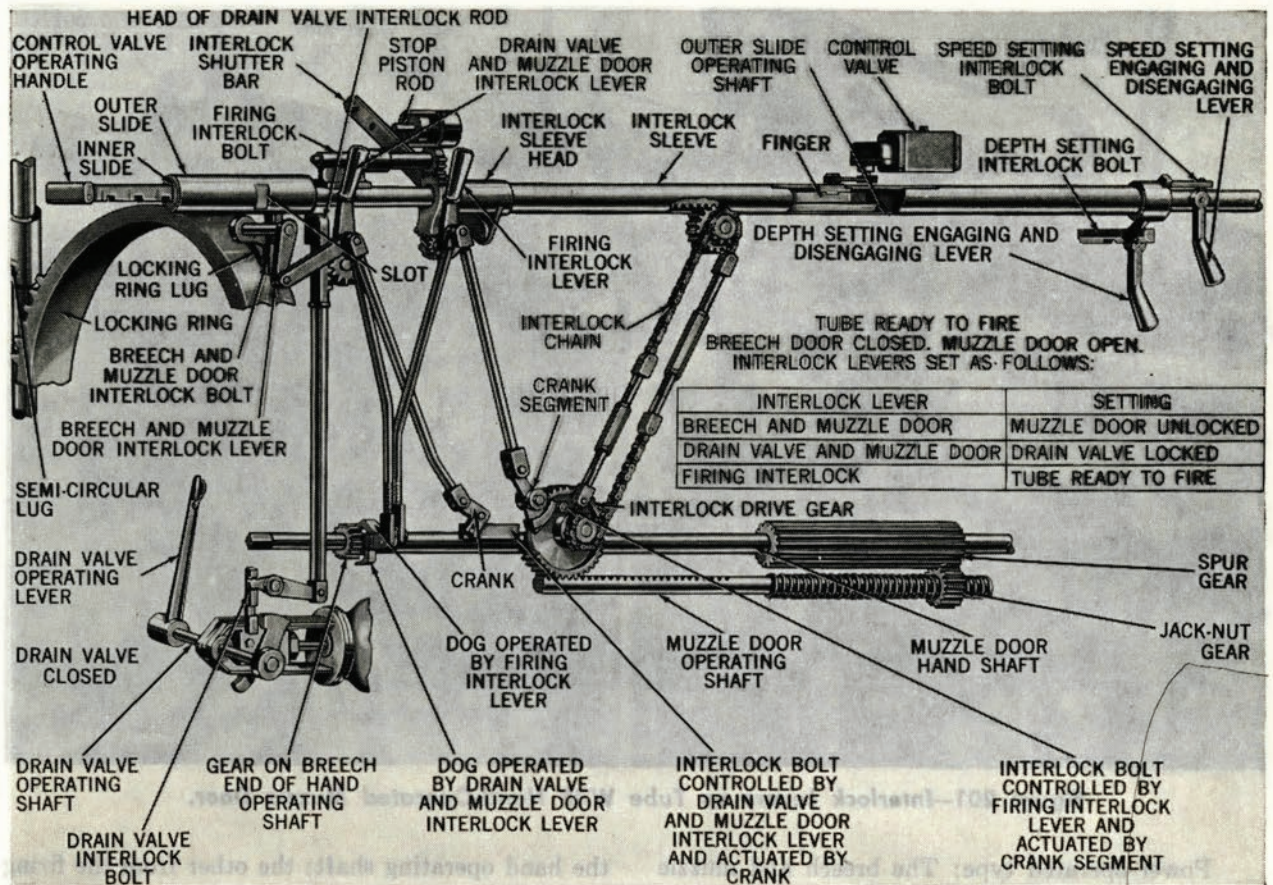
Interlocking Mechanisms—Tube Ready to Fire—Tube Equipped With Power-Operated Muzzle Door.
